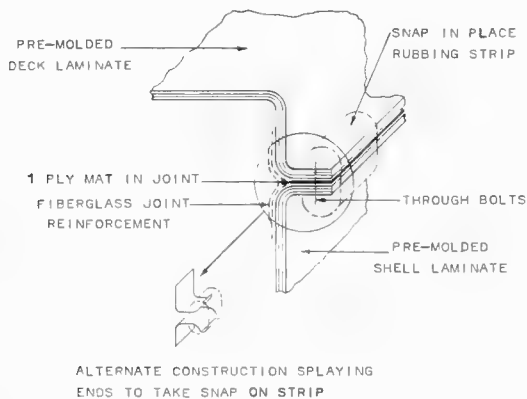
Deck Edge Connection - Small Boat Type with Snap in Place Rubbing Strip
